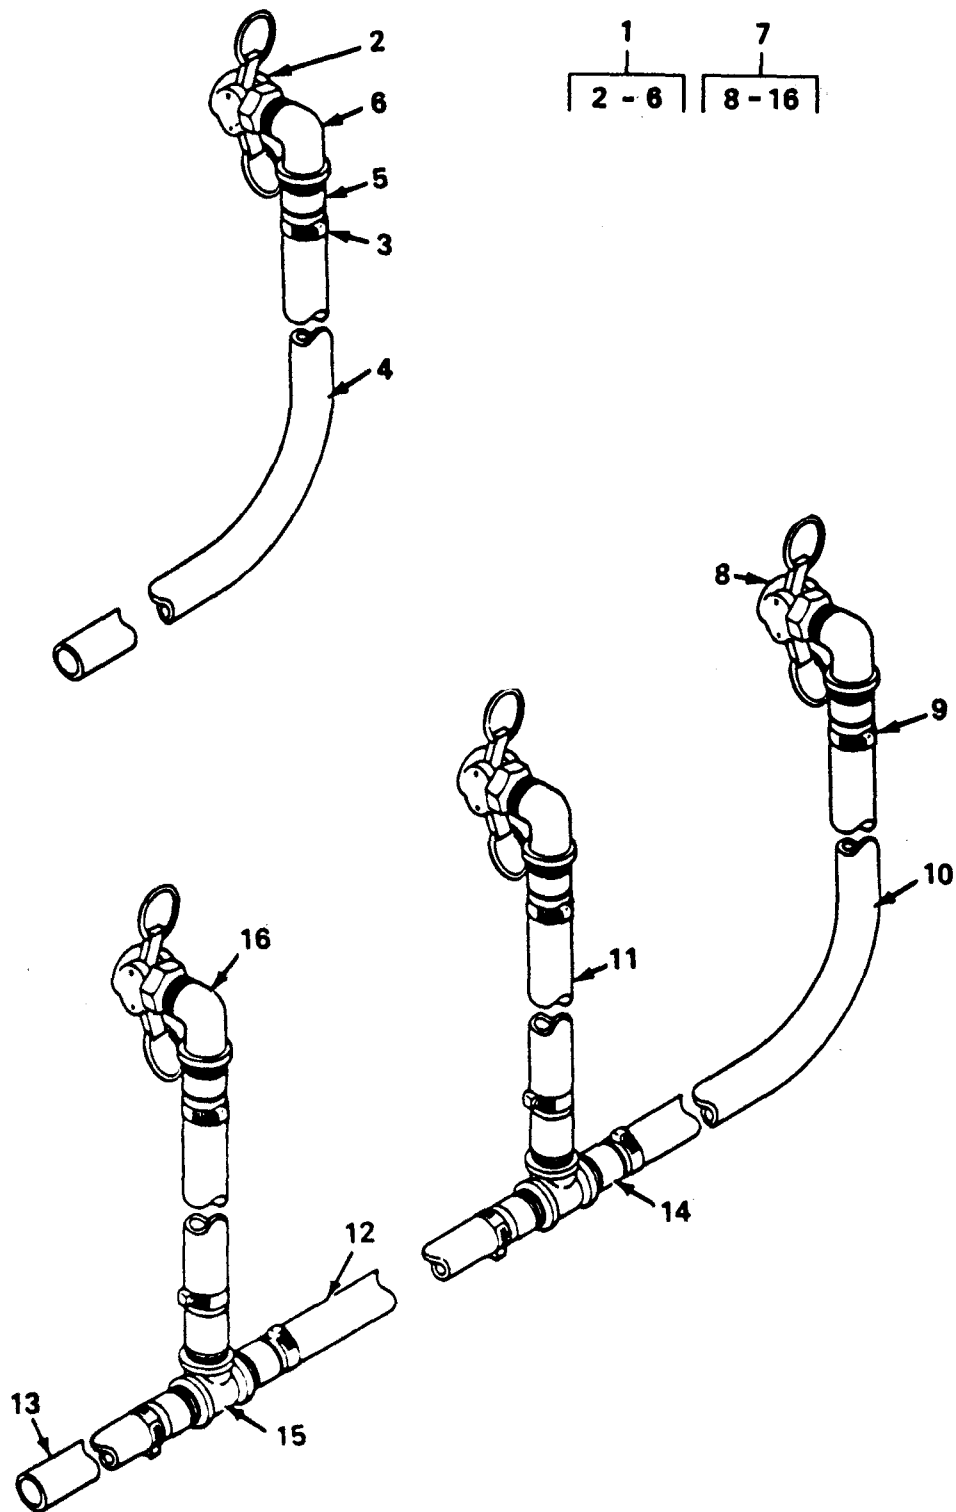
Drain Hose Assemblies, Immersion Sink Rack, Sink Adapter and Thermometer (Sheet 1 of 2).
